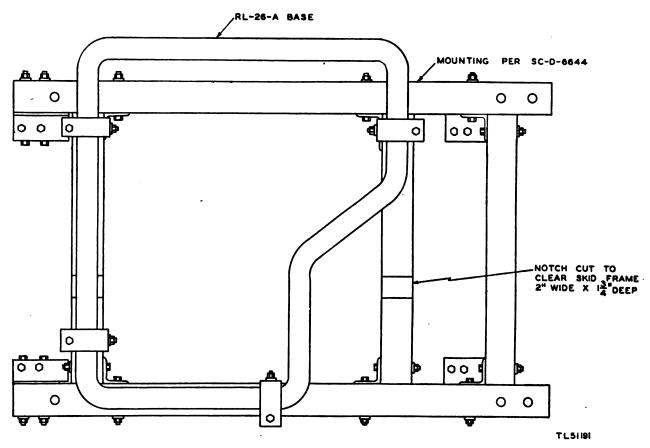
Mounting Reel Unit RL-26-A on %-ton 4x4 weapons carrier with mounting kit.
